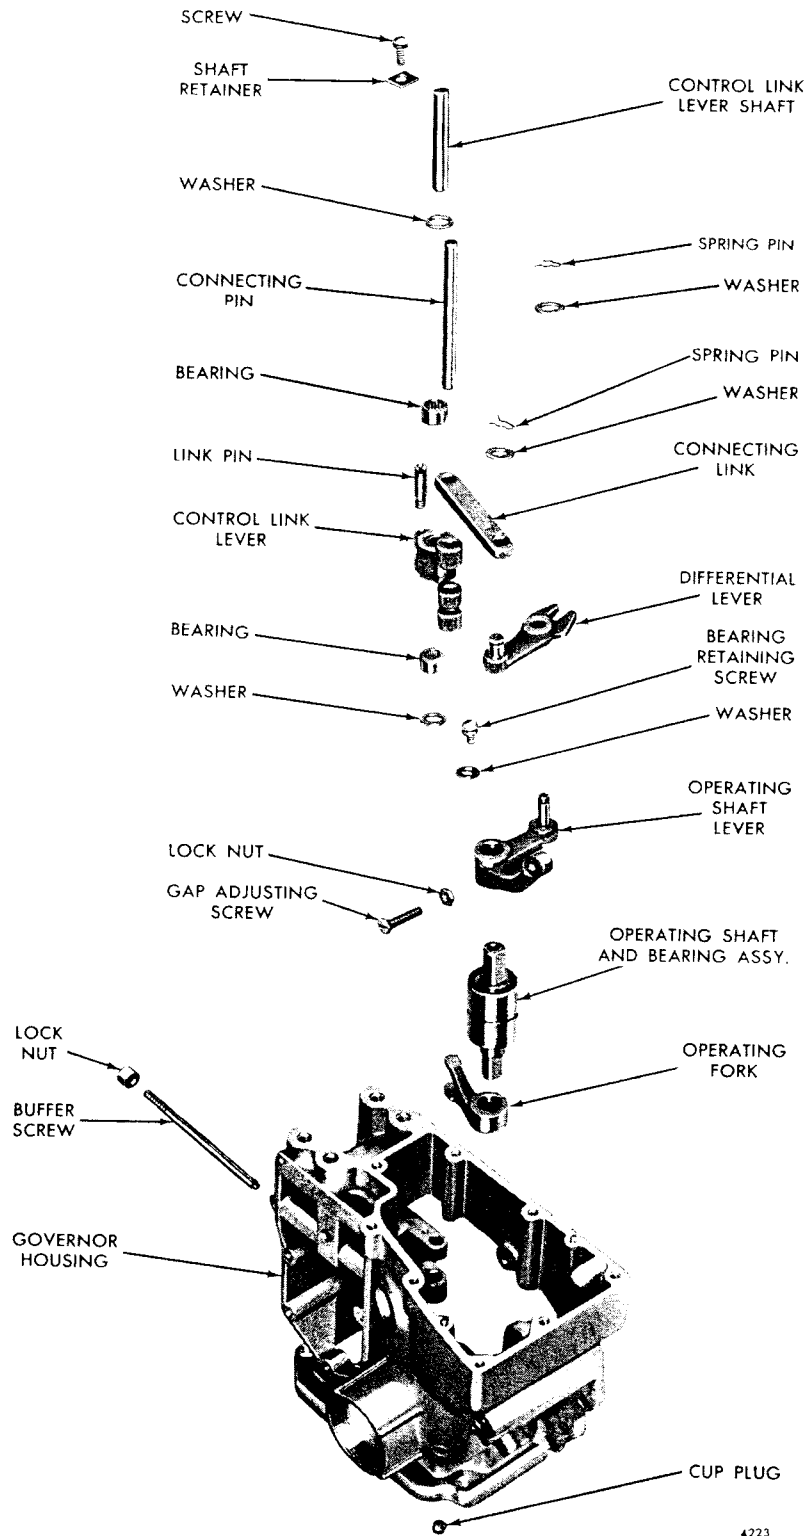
Governor Housing and Operating Shaft Details and Relative Location of Parts
